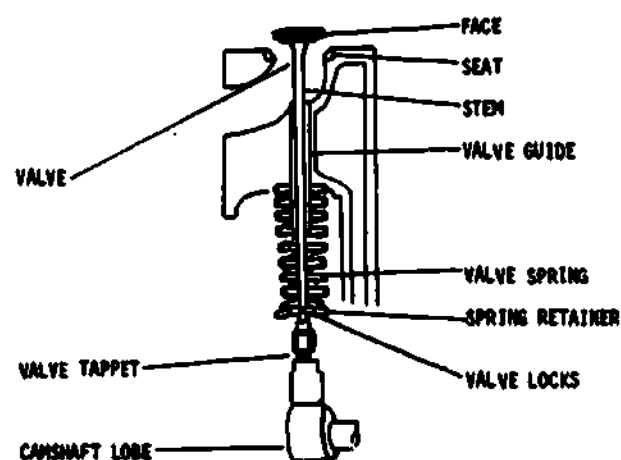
Value mechanism, minus the camshaft and timing gears.
